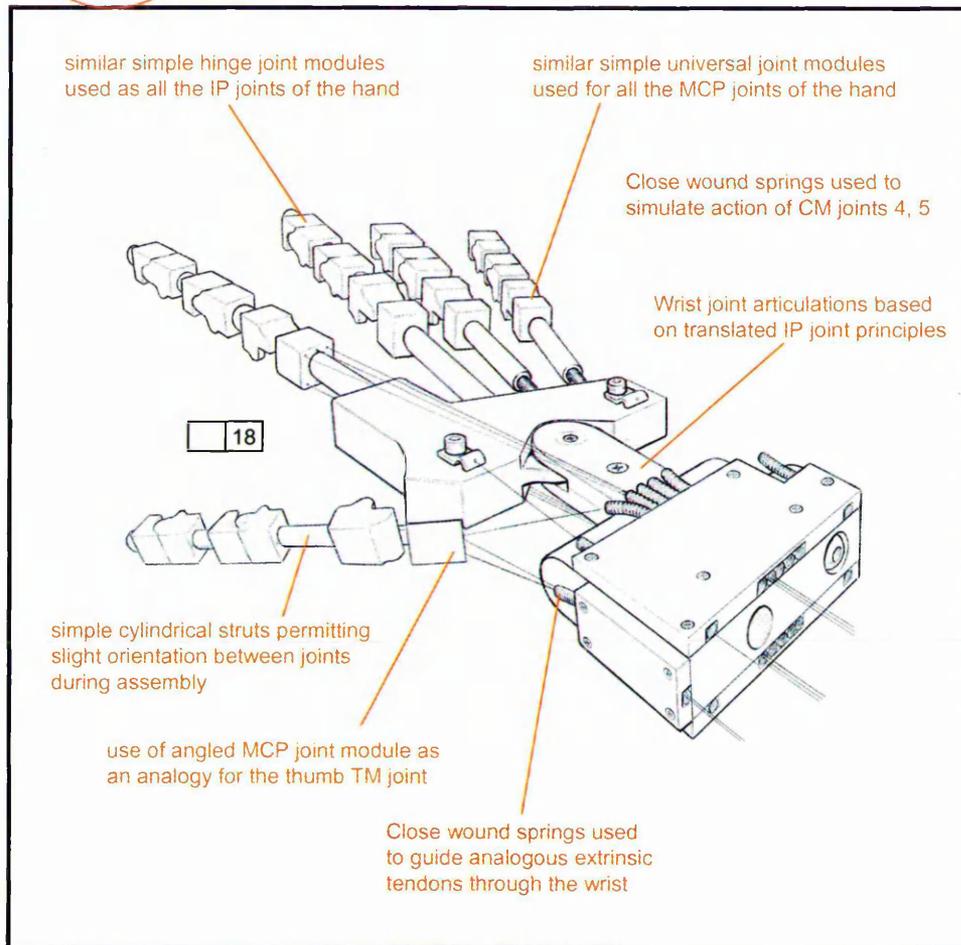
Drawing Showing Joints Assembled into a Skeletal Hand Form
